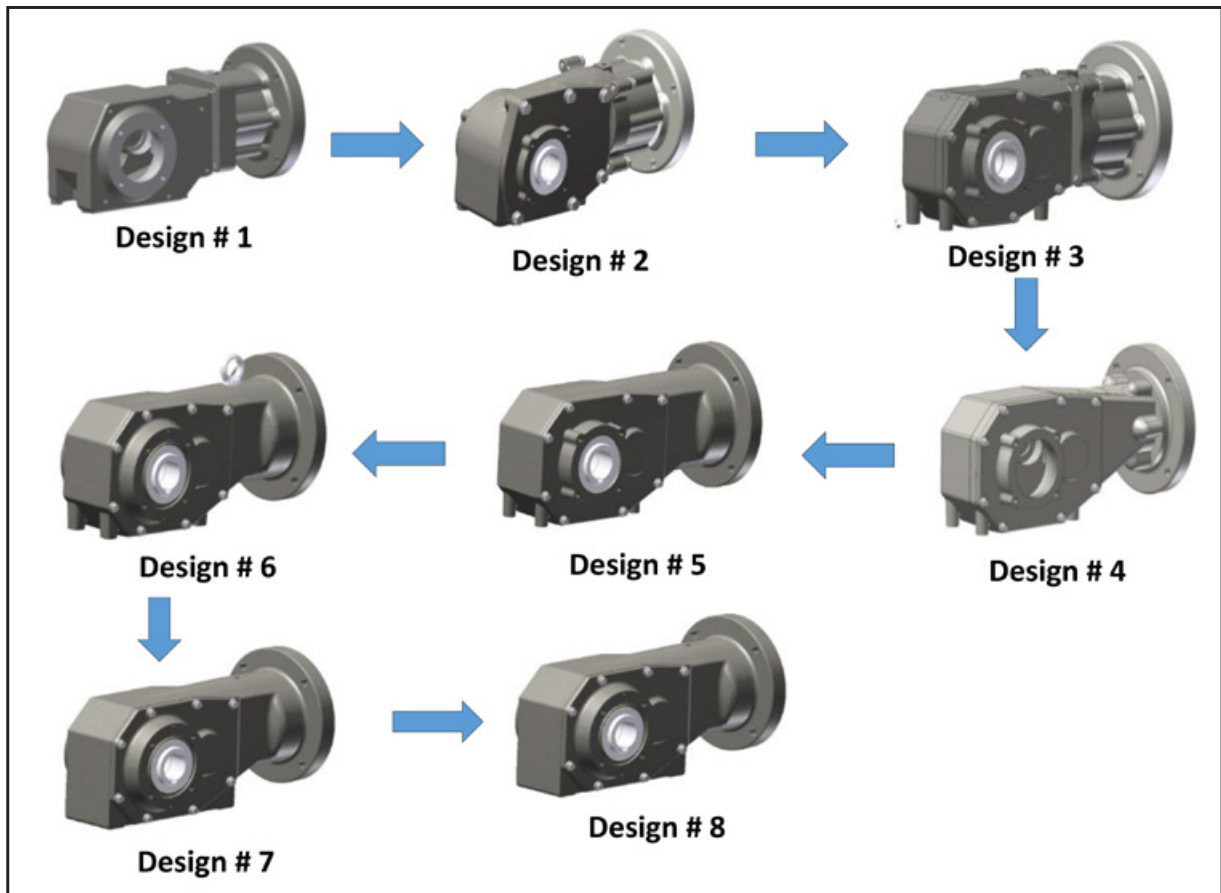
CAD models- From # 1, which is similar to the existing four-piece design, the casing evolved into a three-piece design on the 8th iteration.
